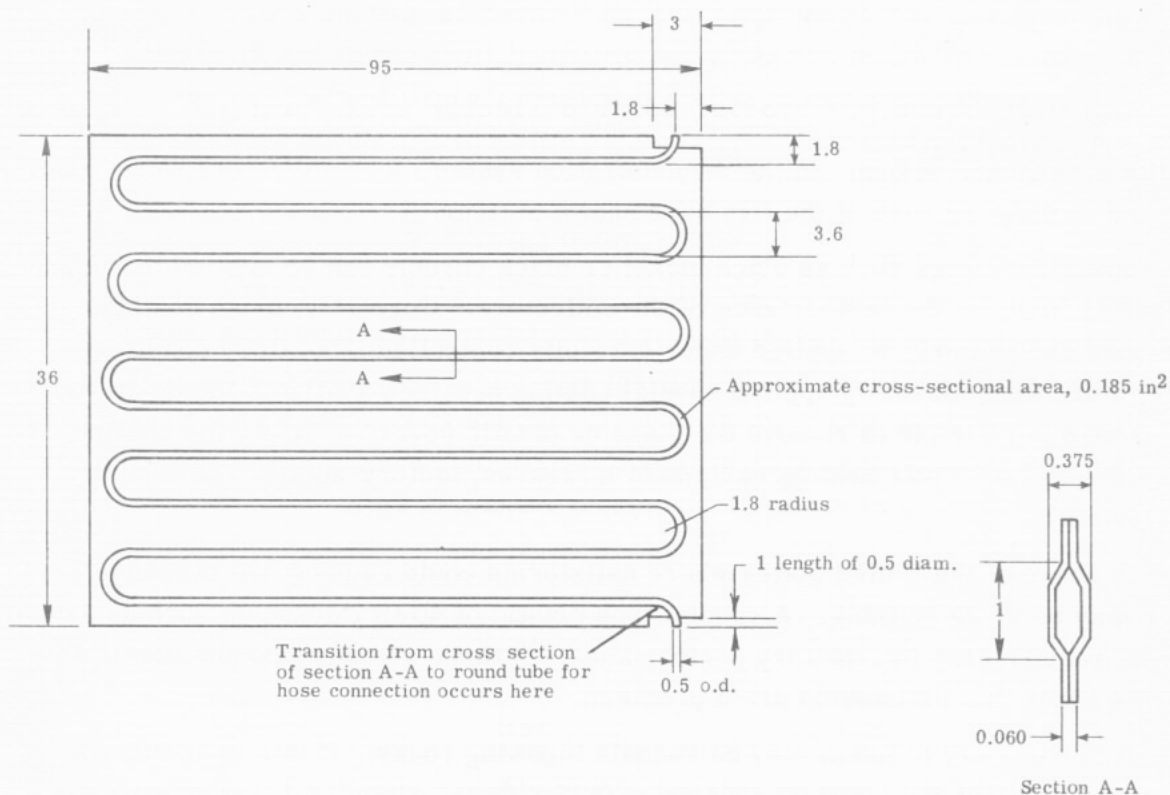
Aluminum solar panel tested by Langley Research Center. Linear dimensions are in inches.
